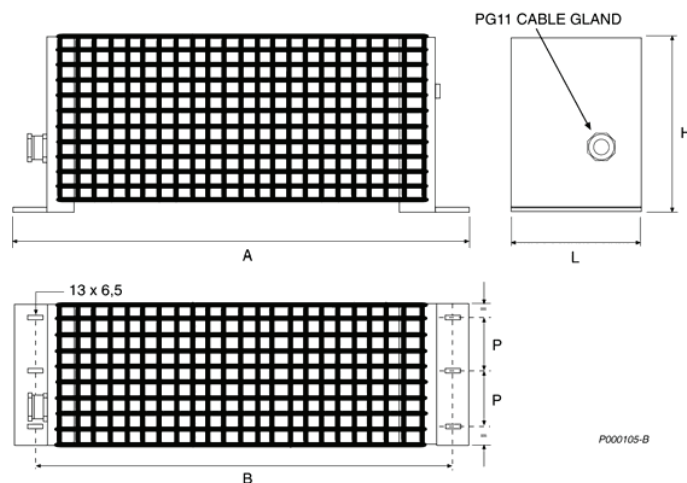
Overall Dimensions for Resistor 4kW, 8kW, 12kW
